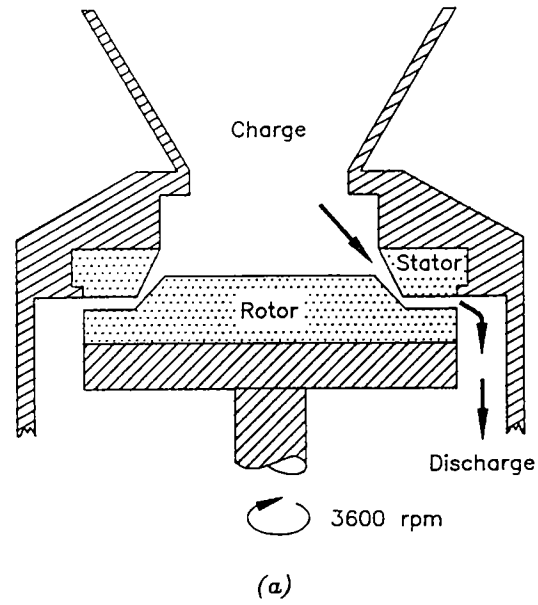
(a) Schematic drawing of the stator/rotor assembly in a high-speed stone mill (grinding region has the shape of a flat annular ring).
